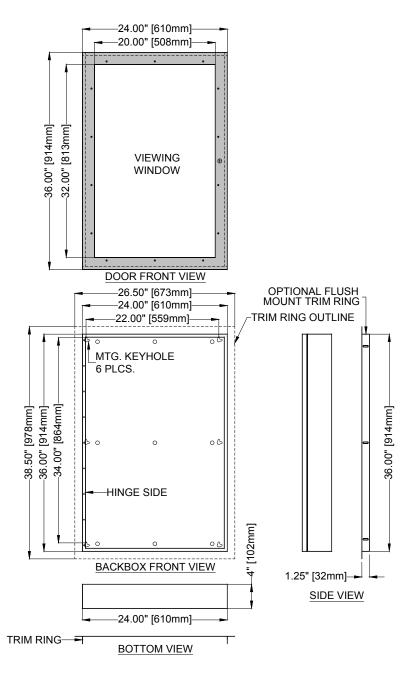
10-123 Door Assembly and Back Box Dimensions
